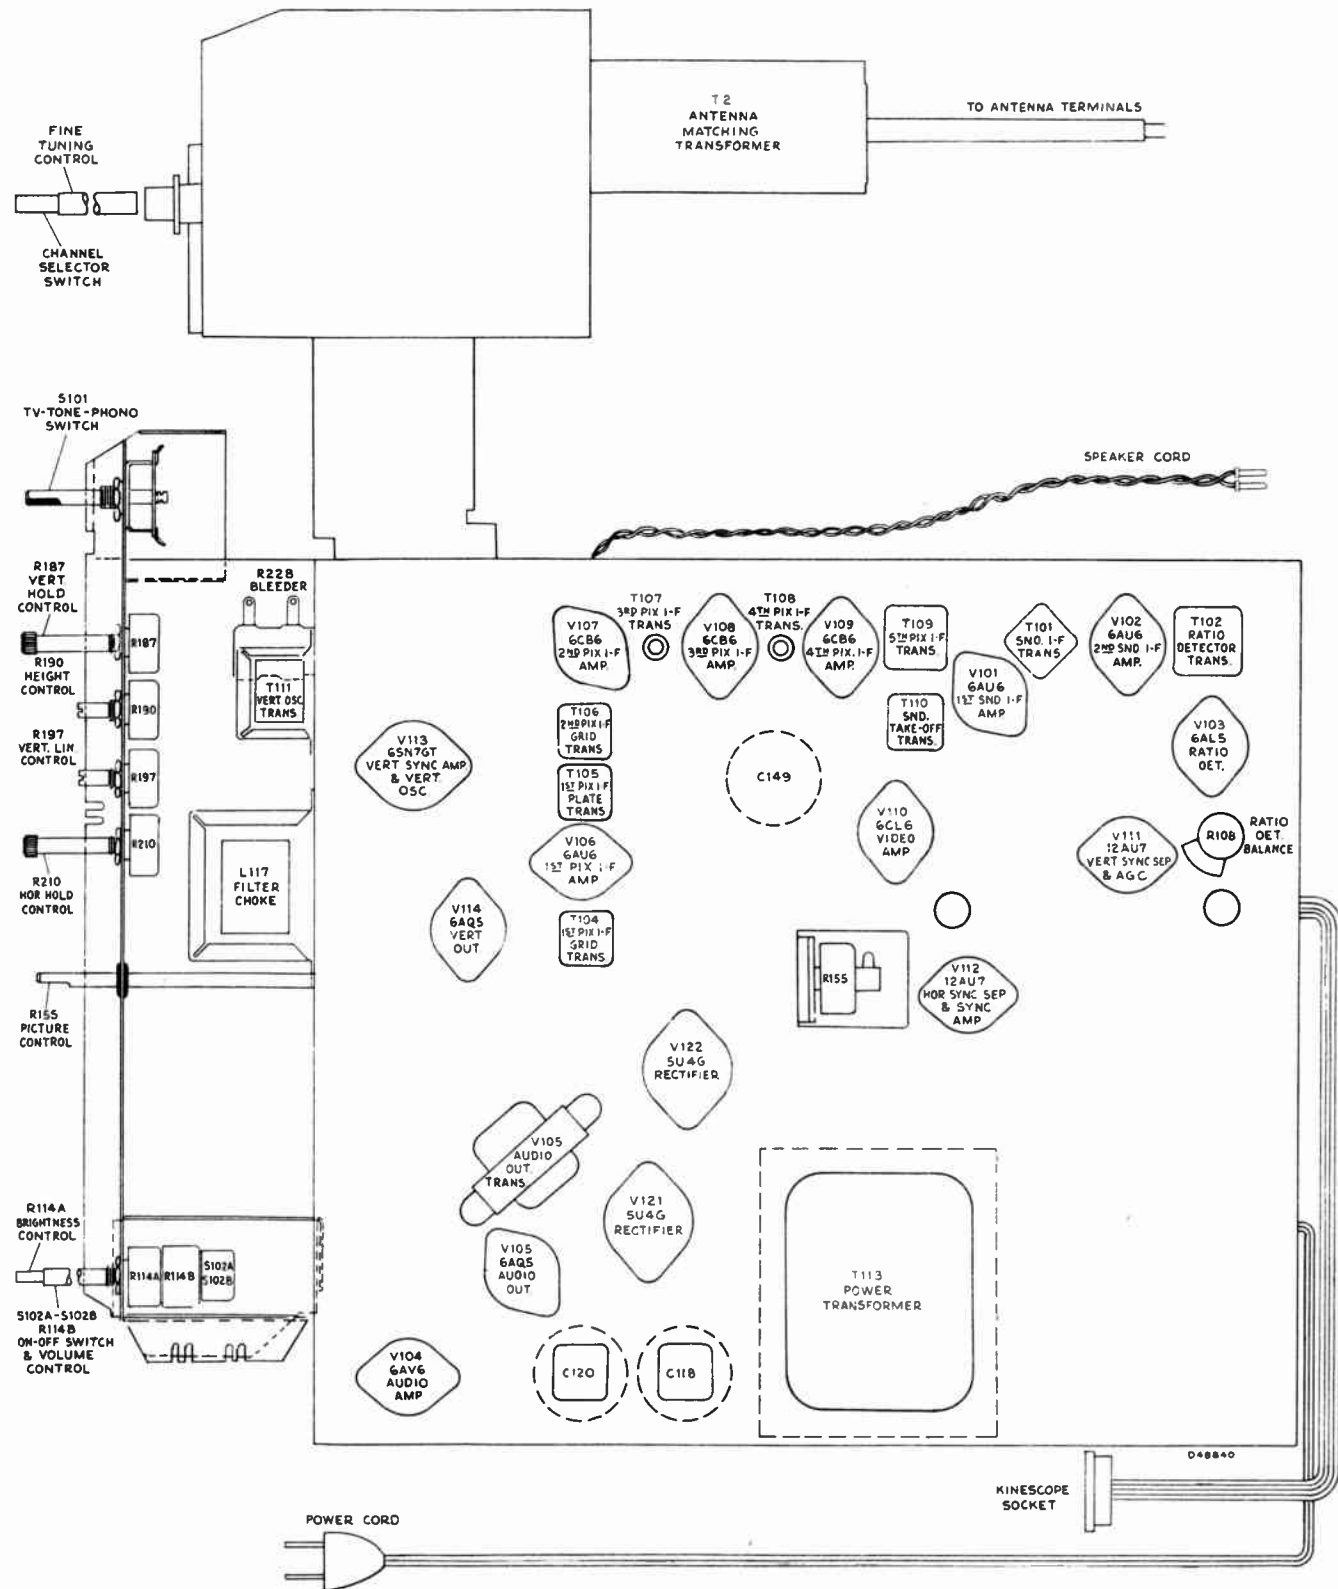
Chassis Bottom View (shown with KRK11B Tuner)
